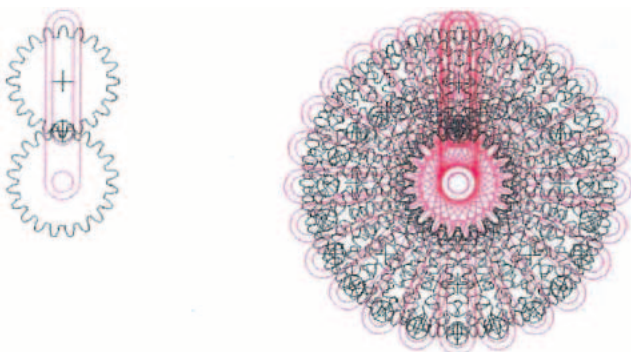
Full-turn epicycloid (cardioid) indexer using two identical involute spur gears.
